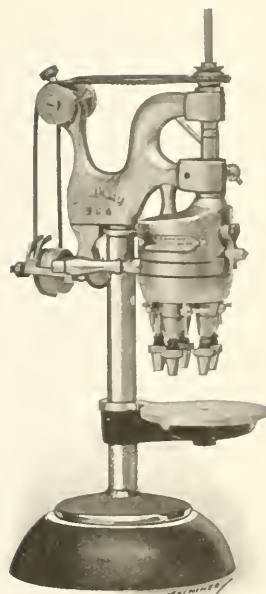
Landau Turret Head Drill with Positive Depth Stops and Tapping Spindle
